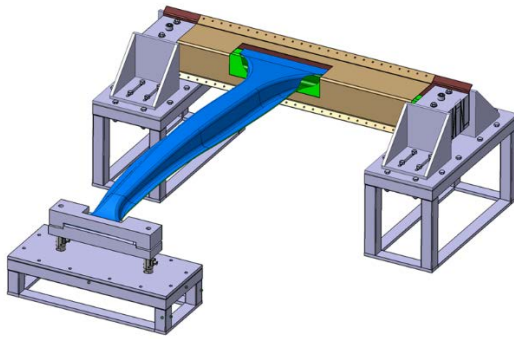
Assembled B-Pillar in Rocker Assembly and Impact Fixtures in Drop Tower
